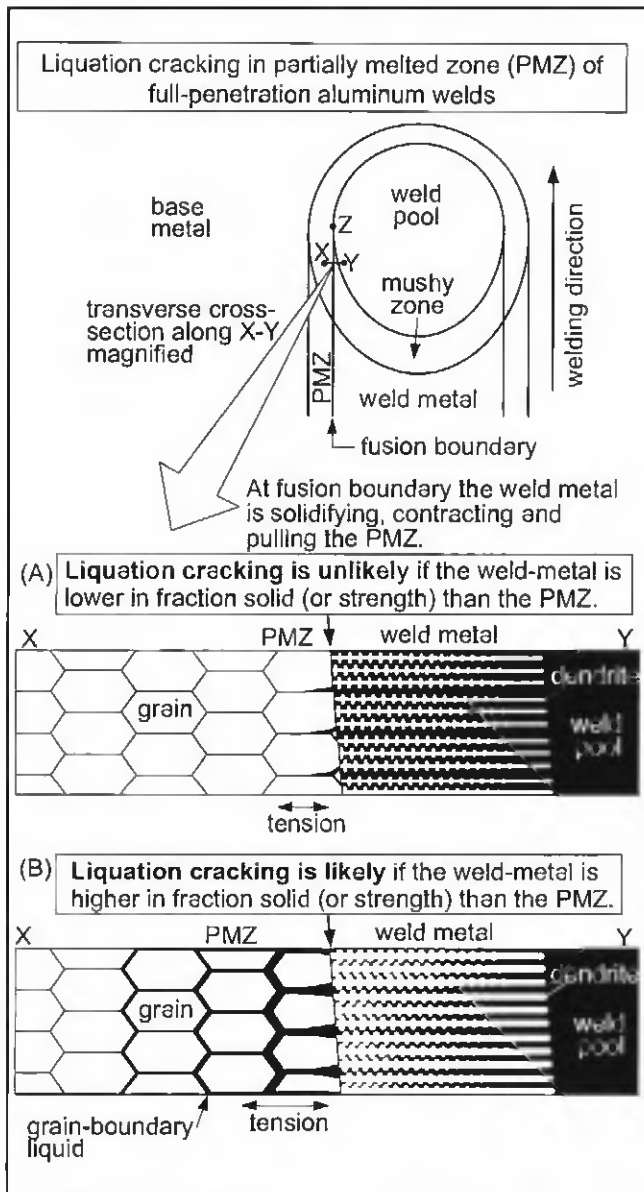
Liquation cracking in full-penetration aluminum welds: A — Liquation cracking unlikely; B — liquation cracking likely.
